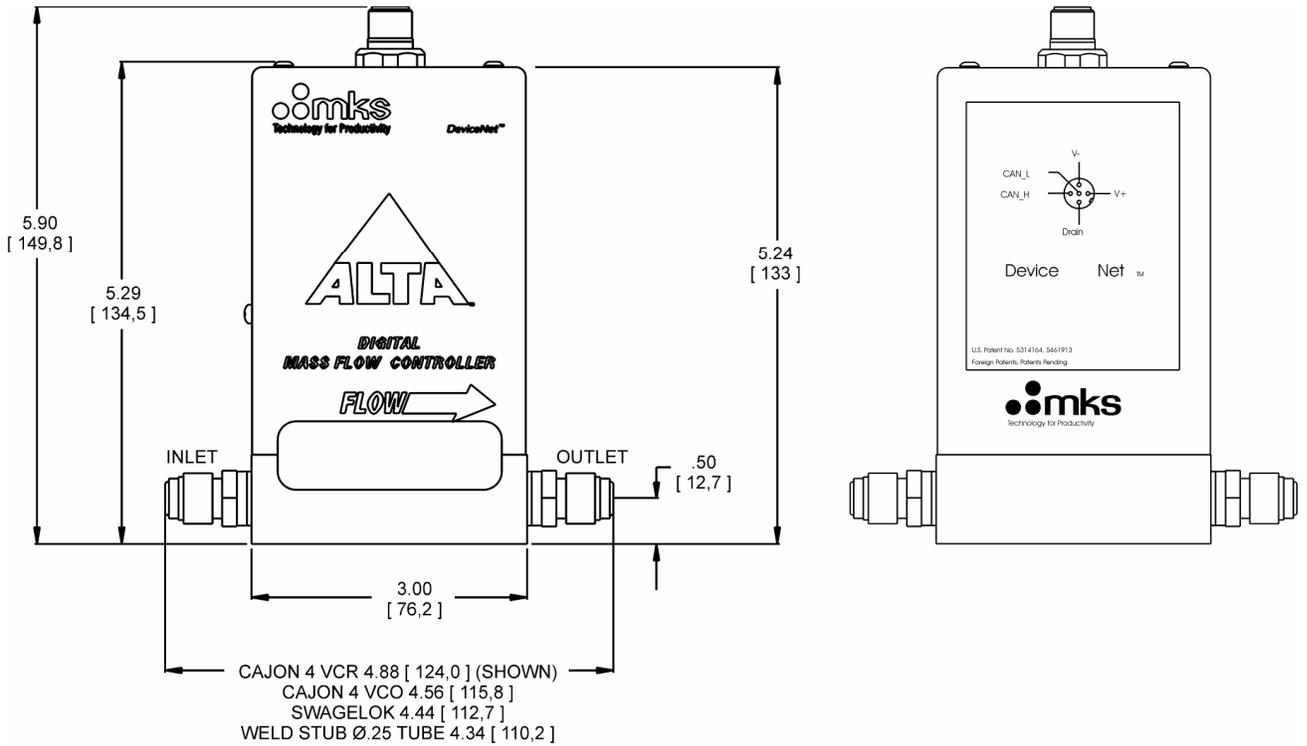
Front and Back Views of the MKS ALTA Mass Flow Devices (Welded Fittings)
